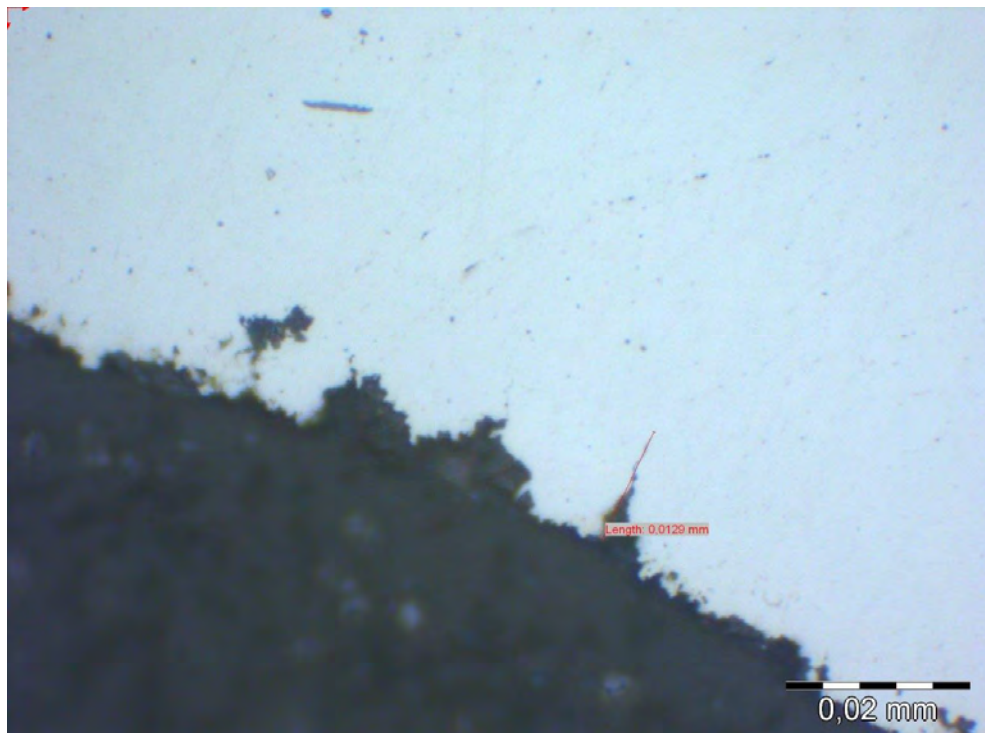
Cut three in crack at segment A, fifth ridge on barrel no. 14389
